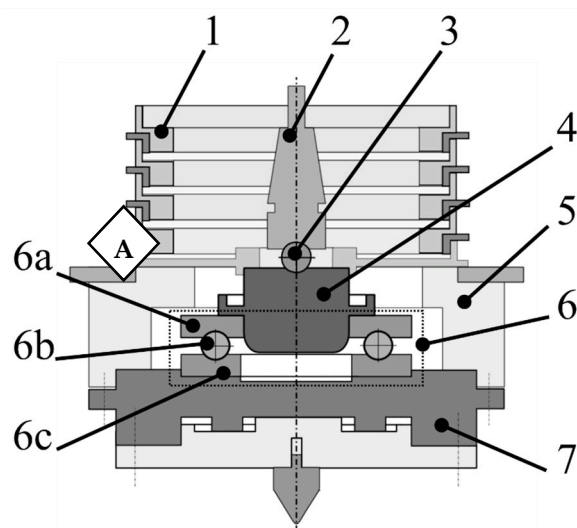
Sectional view of GESA (1 distributing ring/2 driving shaft/3 centring ball/4 shaft/5 housing/6 tested bearing/6a rotating ring/6b rolling element/6c stationary ring/7 bearing ring holder/A acceleration sensor) [36].
